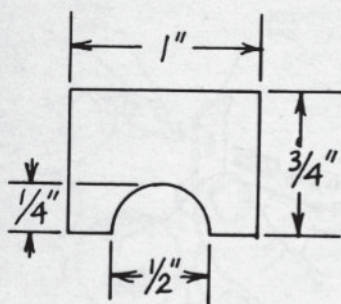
Shims used in crankshaft assembly may be made by cutting 0.015 inch thick plastic, metal or other suitable material in the outline shown above. Refer to Fig. HL243 and text.
